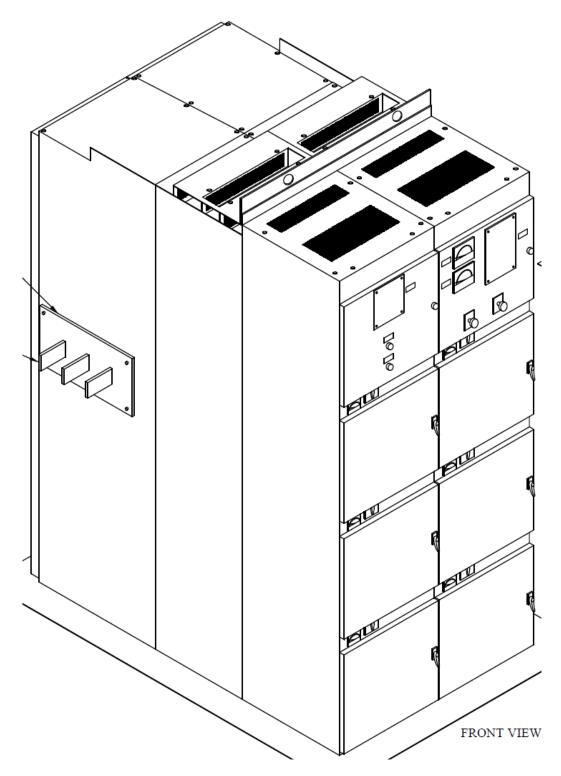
Isometric drawing of low-voltage metal enclosed switchgear.
